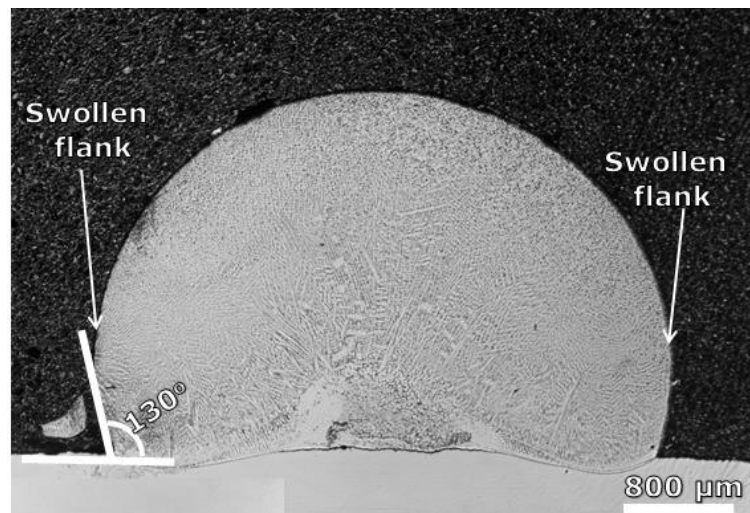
Clad cross-section with swollen flank and obtuse contact angle.
